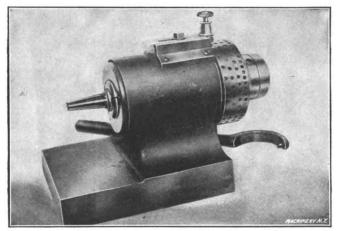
Fixture for Fluting Cutters, used on the Die-sinking Machine
